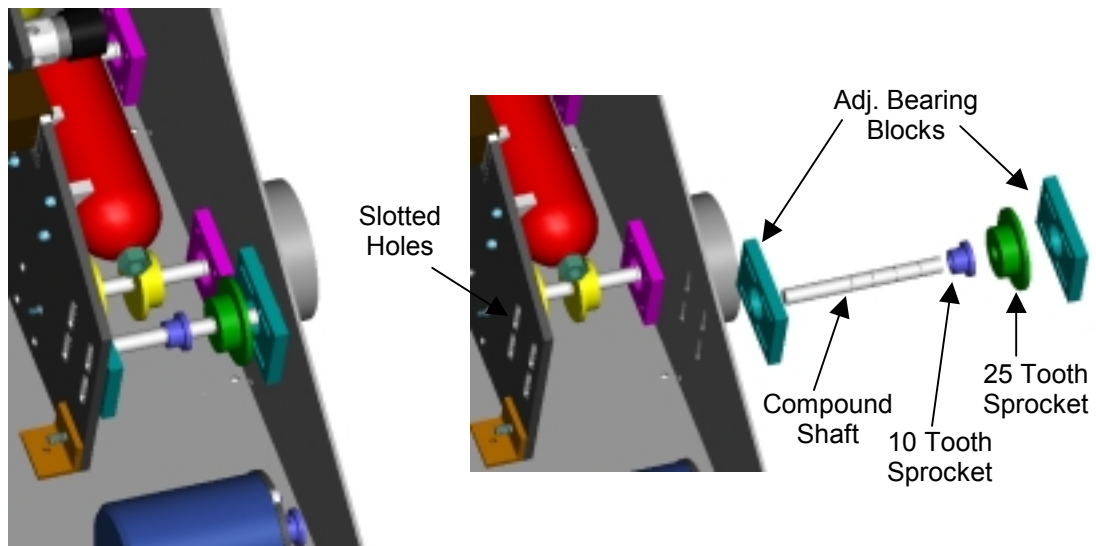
Compound Shaft and Adjustable Bearing Blocks
